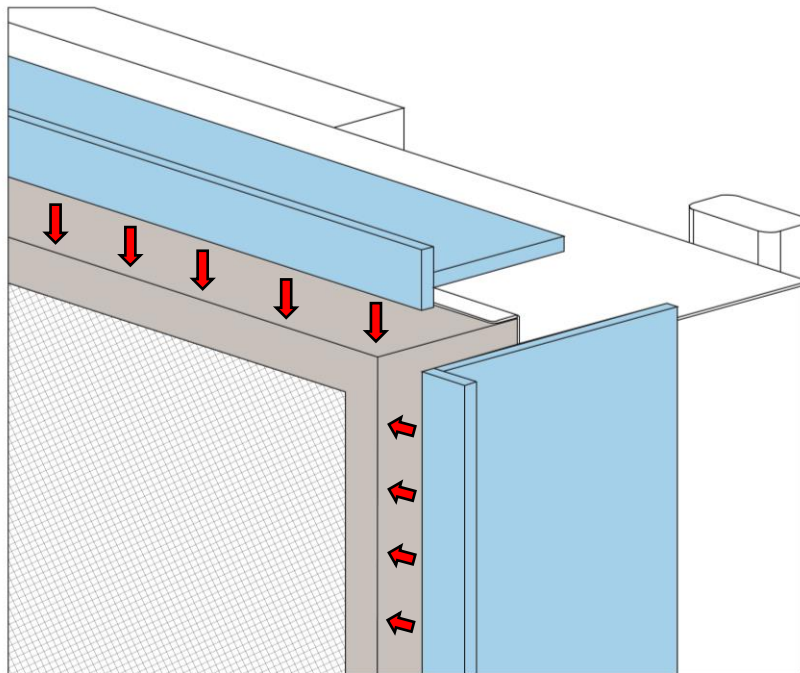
The polypropylene mounting components (shown in blue) are attached along the outside edge of the filter, flush with the filter face. Whenever possible, fasteners should grab the steel housing of the FFU, not the gray aluminum frame of the HEPA filter. The above diagram shows two pieces of a positive pressure frame kit coming together at the corner of the FFU. For a negative pressure room, the mounting component would instead be one solid piece attached in the same way.
